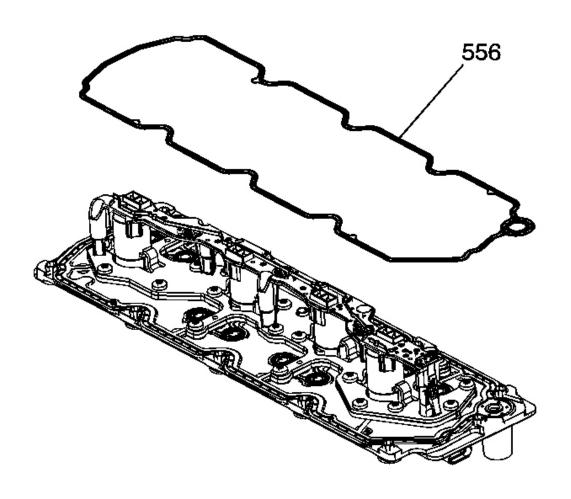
View Of Outer Gasket Courtesy of GENERAL MOTORS CORP.
